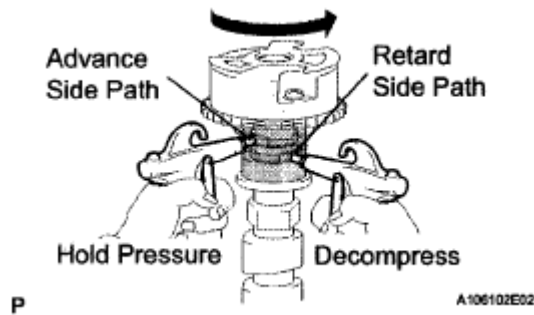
Checking Camshaft Timing Gear Revolves In Advance Direction
